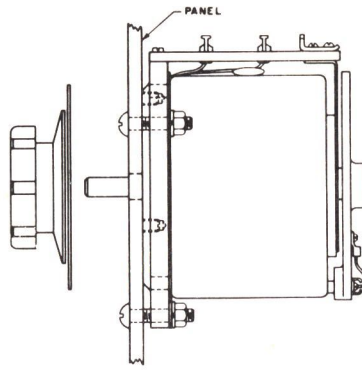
Standard panel mounting, single unit, using clearance holes.
